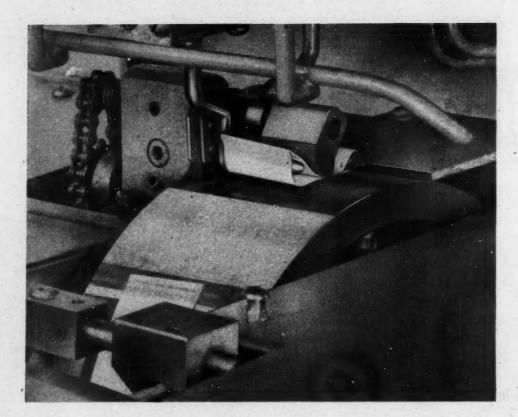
Pick-up drum with seal opened by rotary rubber finger preparatory to transfer to the pick-up fork
